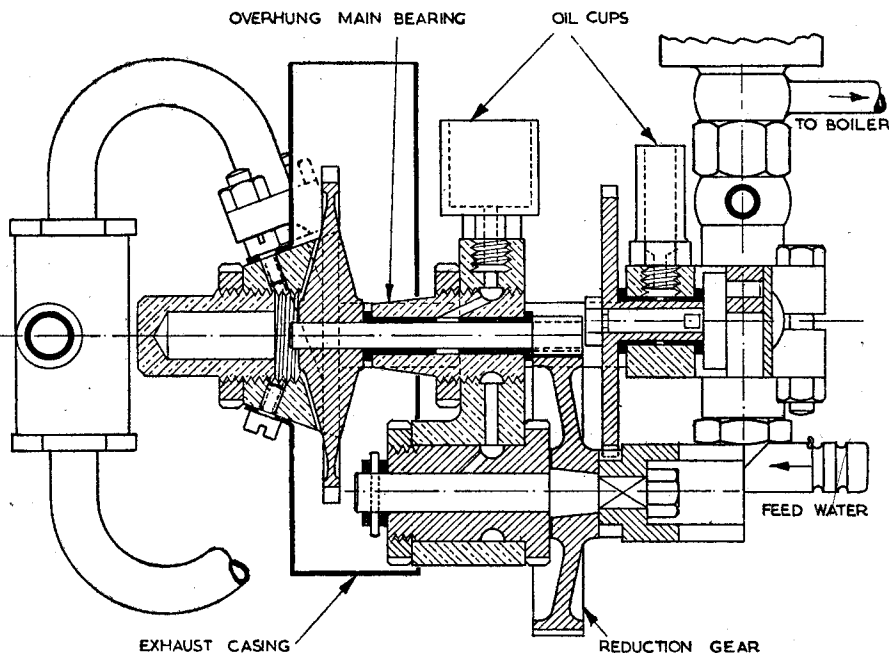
The turbine in its final form with overhung shaft, involute gears, exhaust casing and twin plunger feed pumps
